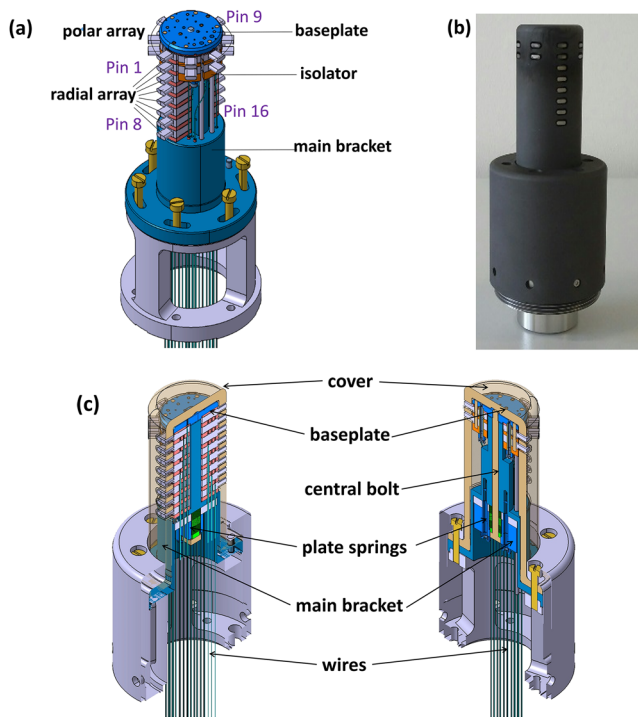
Design of the Mach probe head without cover (a), the picture of the Mach probe head (b), and the cutaway views of the Mach probe head (c). The orange parts are isolators, and the silver parts are pins. Some pins have been labeled in the diagram by blue text. The pins of radial array seen in the diagram are labeled 1-8 from top to bottom, and the pins on the opposite are labeled 9-16. The pins in the first polar array are labeled 1, 18, 20, 22, 9, 23, 26, and 27 counterclockwise, while the pins in the second array are labeled 2, 17, 19, 21, 10, 24, 25, and 28.
